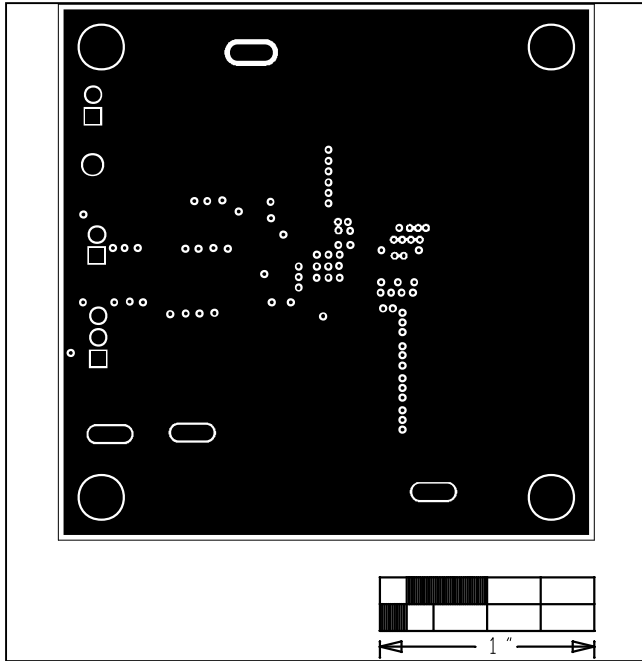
MAXM17504 EV Kit PCB Layout—PGND Layer 2
